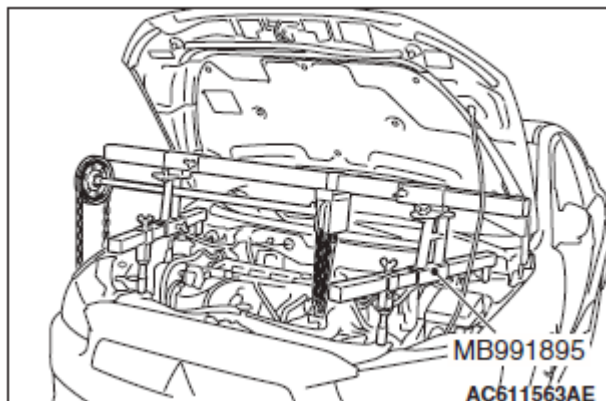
Supporting Engine Assembly Using Special Tool MB991895
